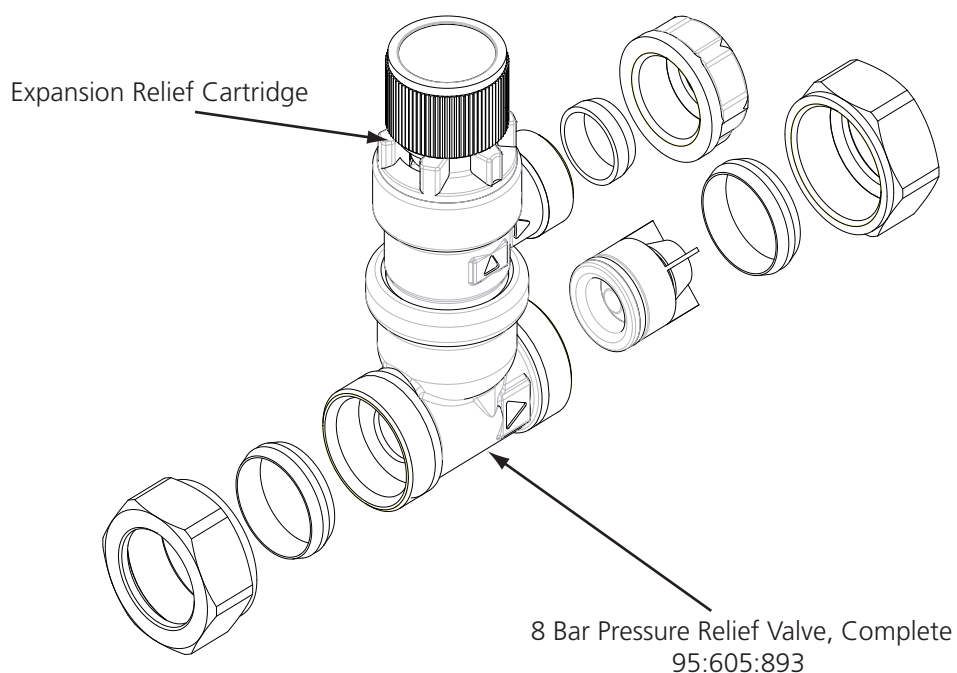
Exploded View of 8 Bar Pressure Relief Valve
